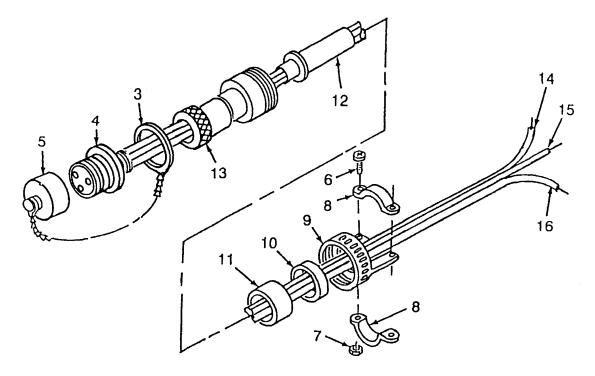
Power Cable Adapter Cord Repair (Sheet 3 of 3)
